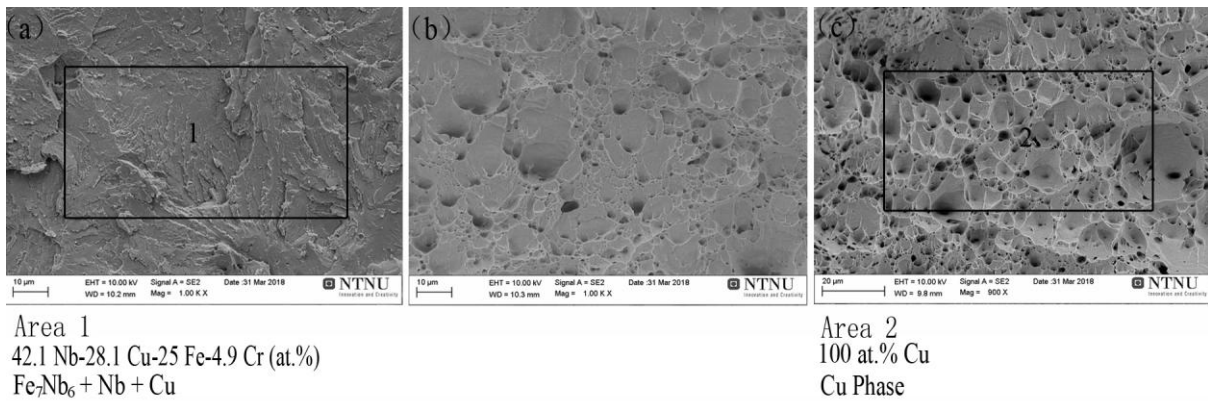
Fracture surfaces of the tensile specimens welded with (a) a 1-mm-thick Cu interlayer, (b) a 1.5-mm-thick Cu interlayer, and (c) a 2-mm-thick Cu interlayer.
